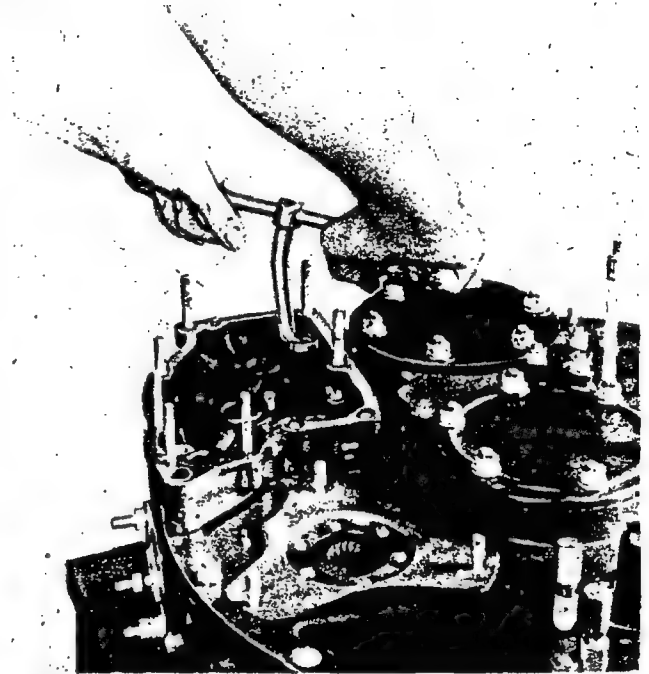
Loosening or Tightening Hidden Nut in Dual Accessory Drive Housing
